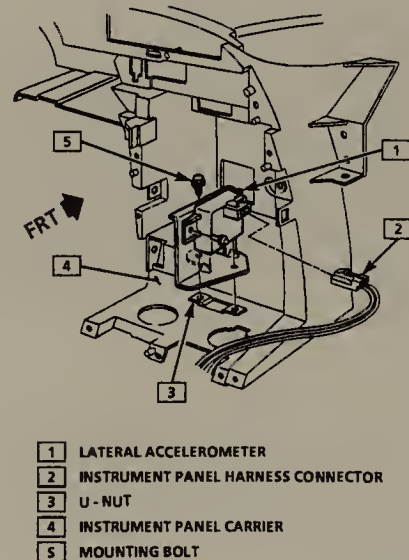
Exploded view of the lateral accelerometer—1995 vehicle shown, others similar
